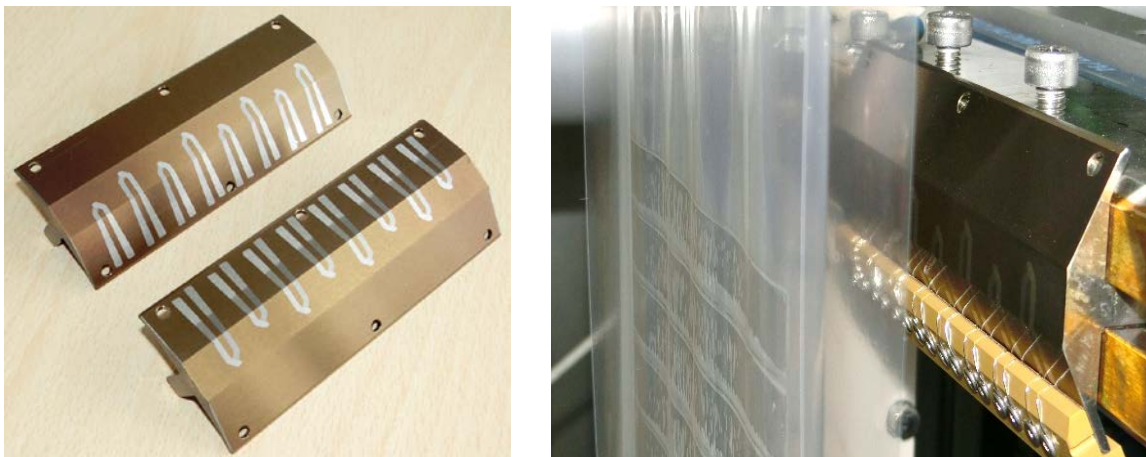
Tool demonstrator with thermocouples and protective coating (left); demonstrator in the lifetime test rig that based on a horizontal cross-seam sealing unit of a tubular bag machine (right)
